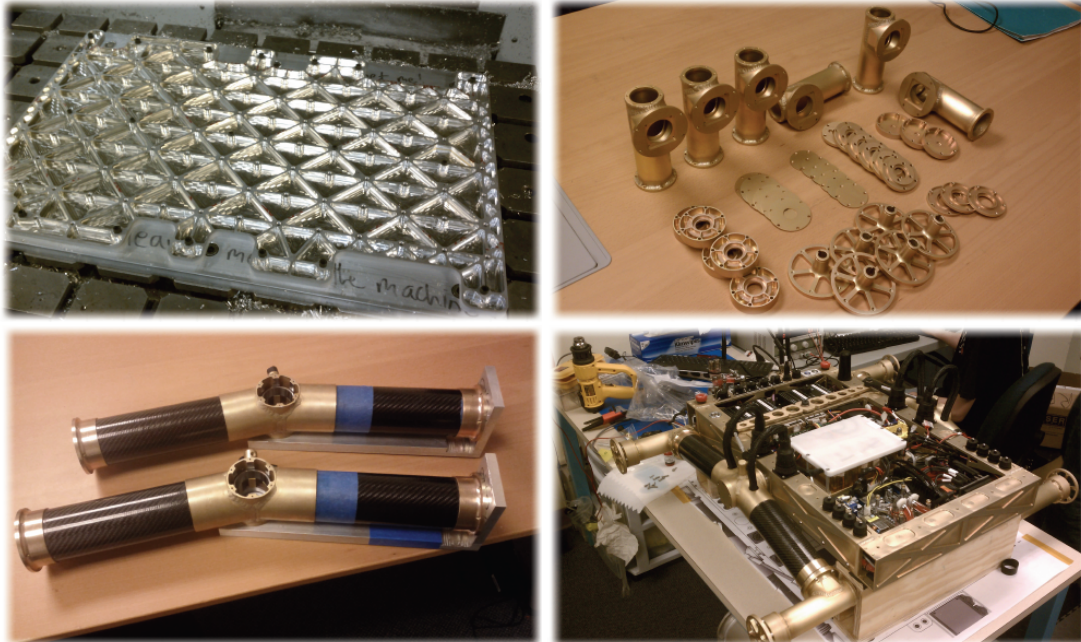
Manufacturing, Assembly, and Integration: Machining Top Plate (upper left), Chromate Conversion Coated Drive Module Parts (upper right), Bonding Carbon Fiber Fixture for Rocker Arms (bottom left), Electronics Assembly (bottom right)
